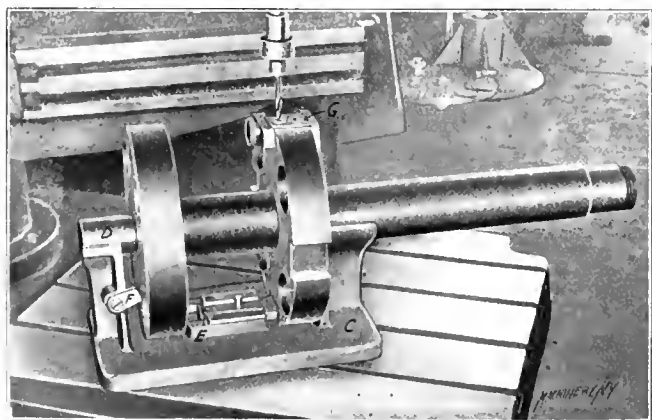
Drilling the Screw Holes for Holding the Indexing Blocks and the Filling Pieces.
